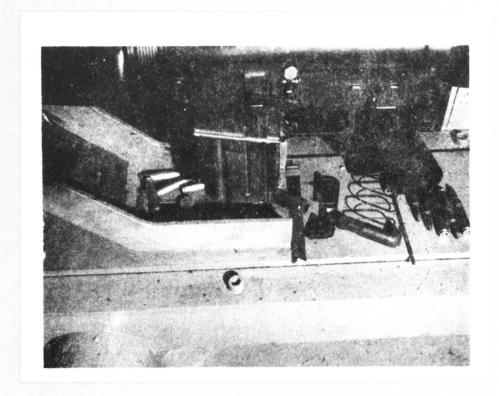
Side view of lower receiver showing auxiliary parts of damaged magazine, cartridges, dust cover and dust cover pin.
